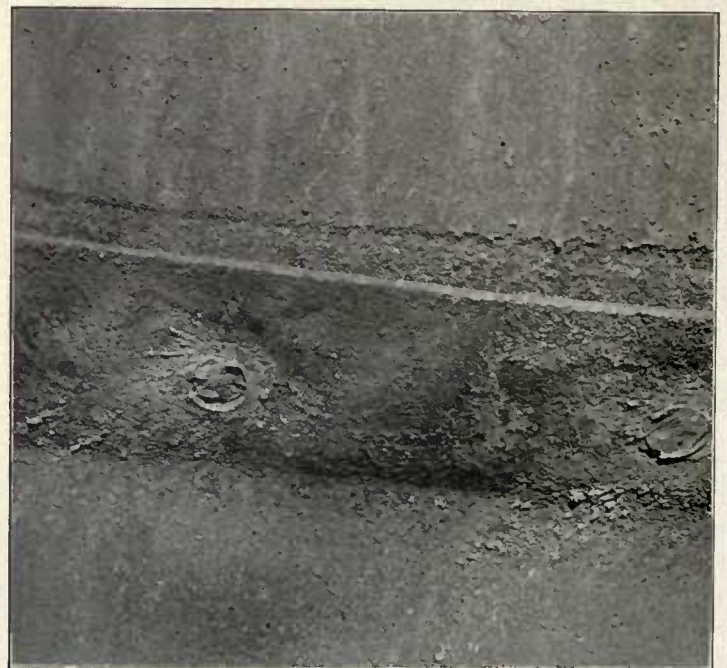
Rivet Heads Are Cut Off Flush, but the Plate is Not Injured by the Oxy-Acetylene Flame.
